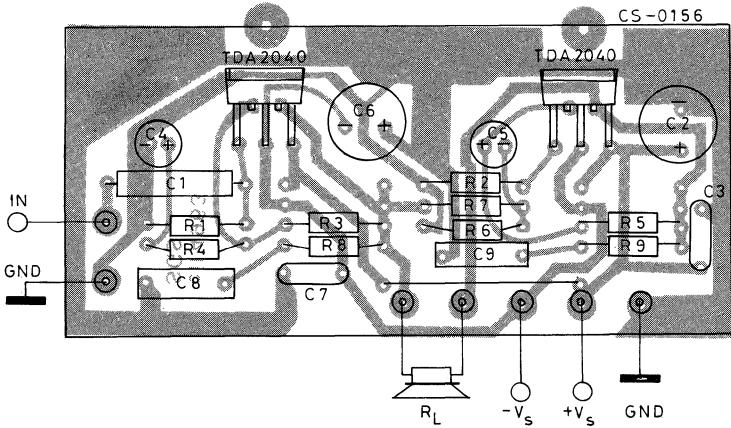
P.C. board and components layout of the circuit of fig. 3.
